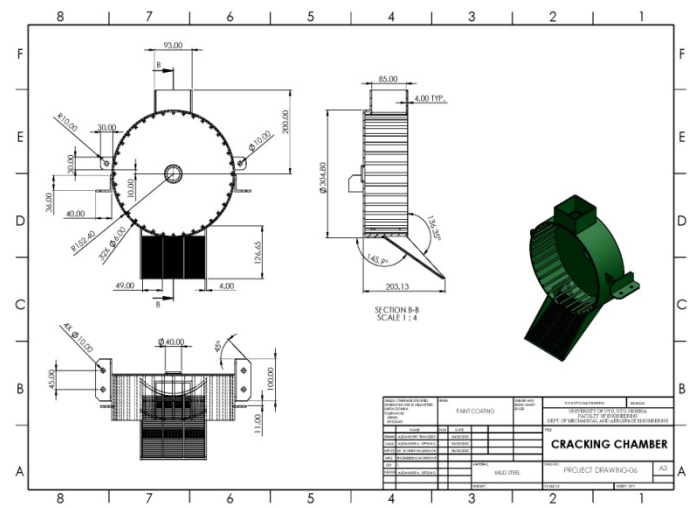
Components drawing the palm kernel nut cracking machine [Cracking Chamber]
